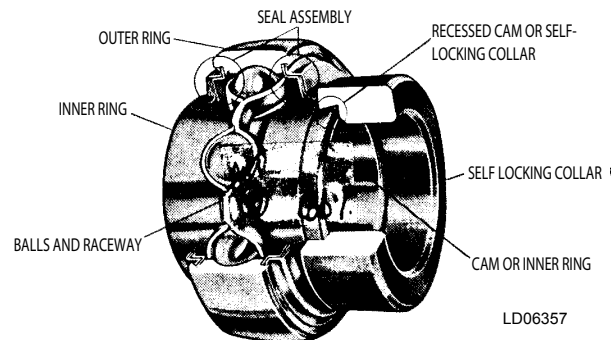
BEARING WITH ECCENTRIC CAM
